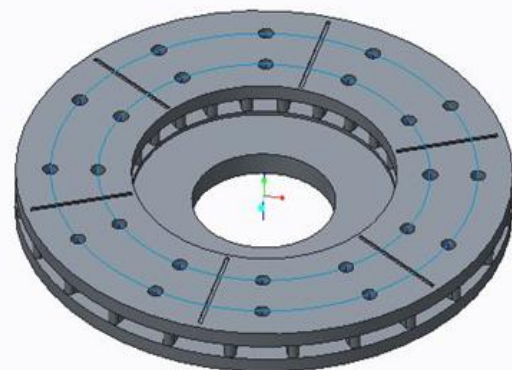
Ventilated Type Drilled Disc Rotor with Face Groove
